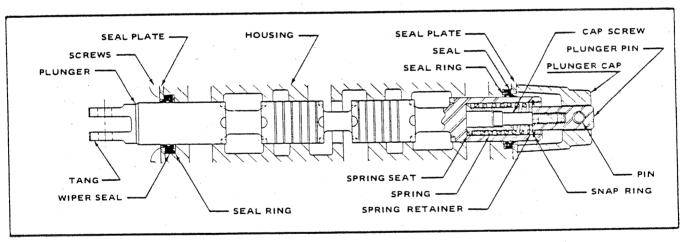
Double Acting - Spring Centered Plunger (Hydraulically Balanced)
